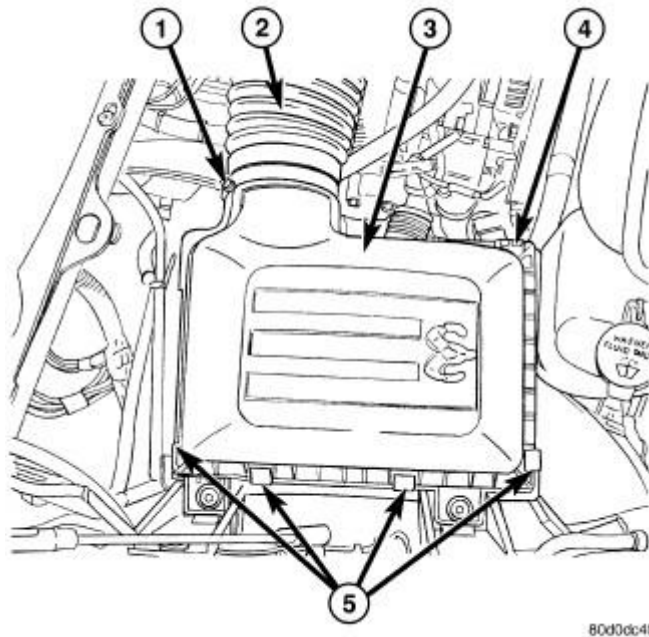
Air Cleaner Housing Cover, Air Duct & Fasteners
